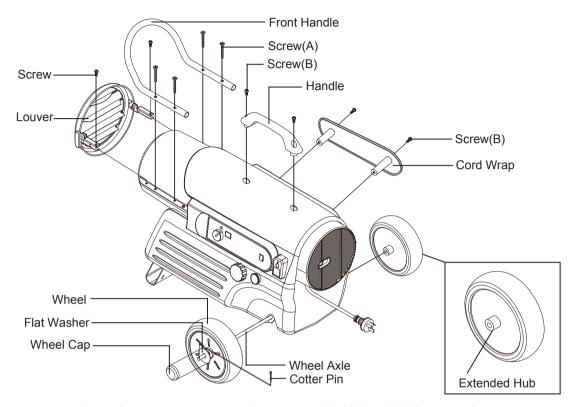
Wheel and Handle Assembly, IH125000/IH170000 Models Only
